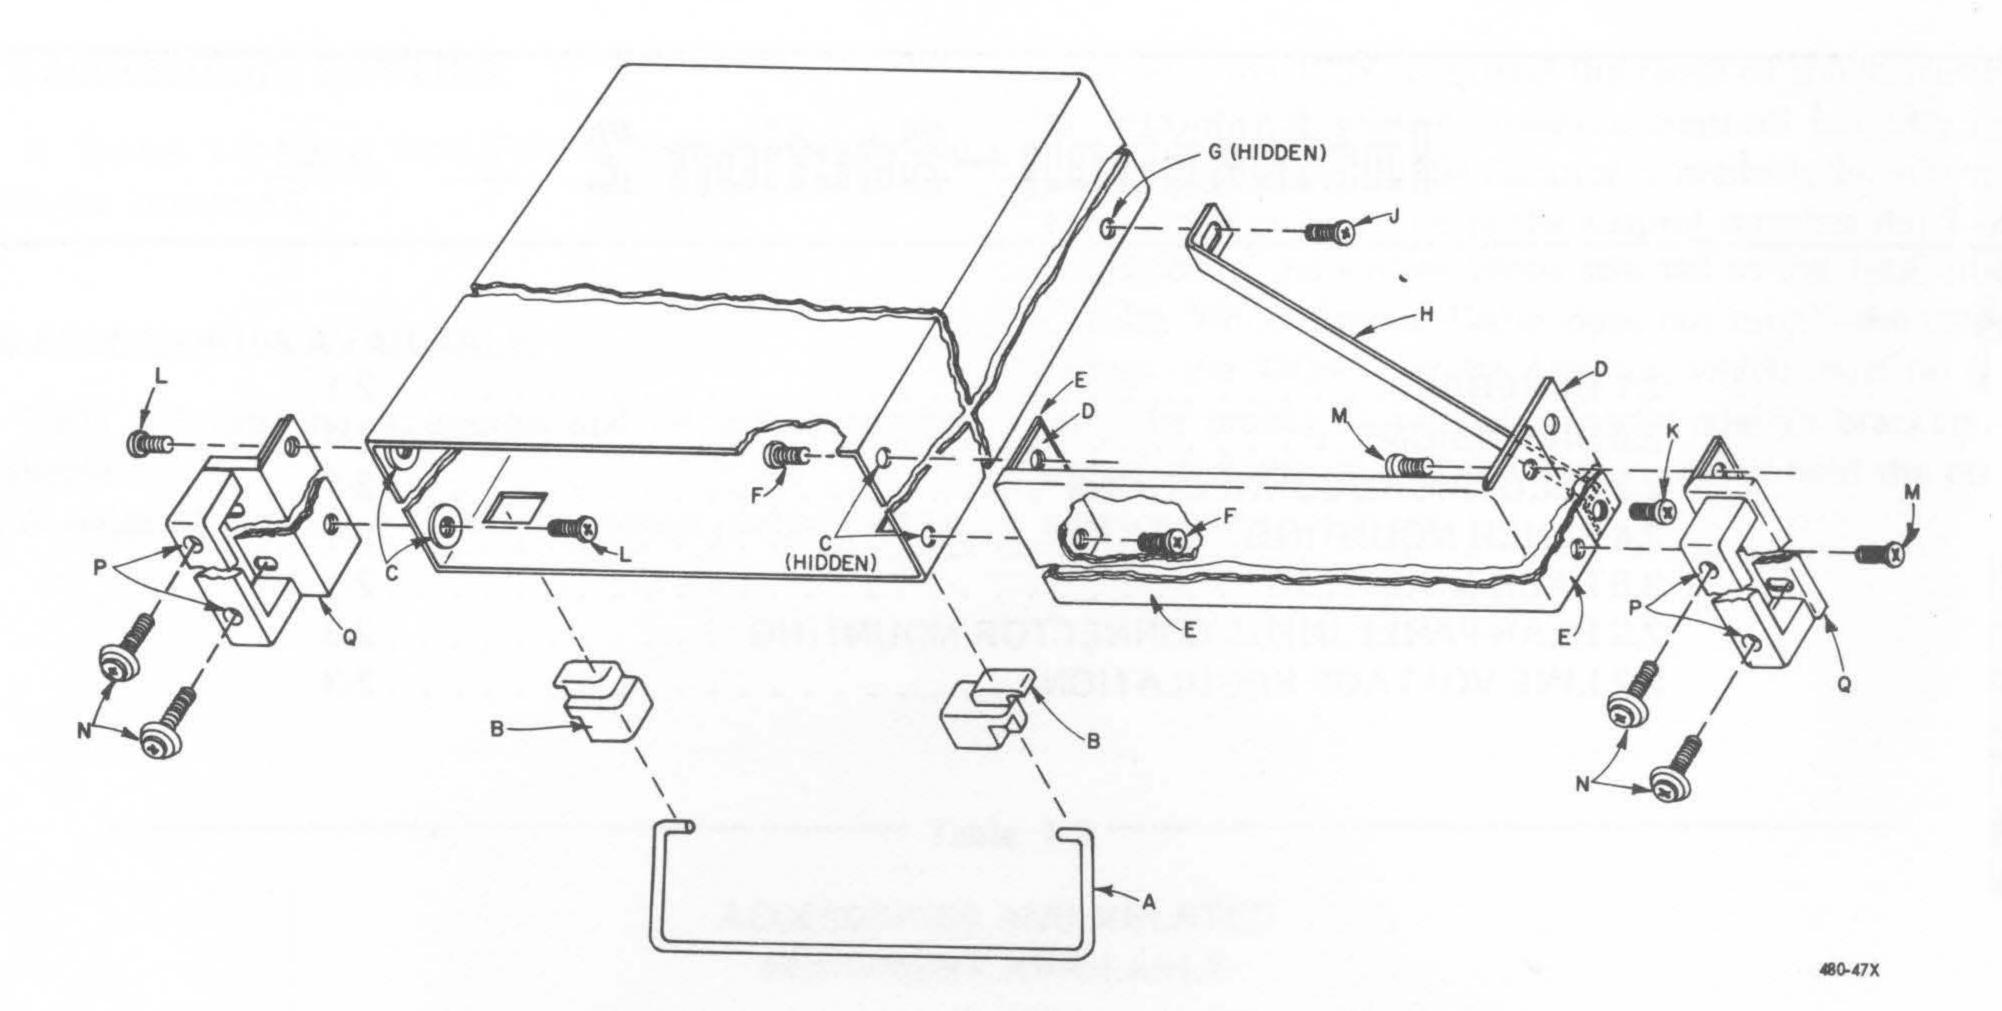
Method of mounting the 1808 and a blank panel in a relay rack.
